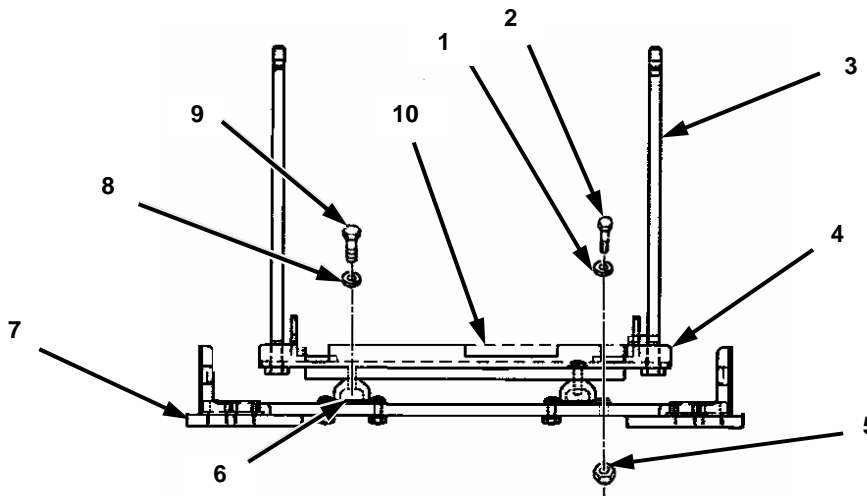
Drilling, Tapping and Installing Steel Insert in Fourth Mounting Hole.
